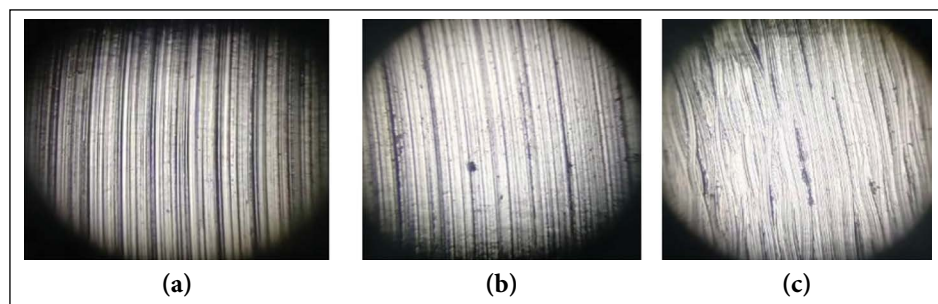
Tool marks from the machining surface (a) cryogen from the front of the tool (b) cryogen from the back of the tool (c) dry machining.
